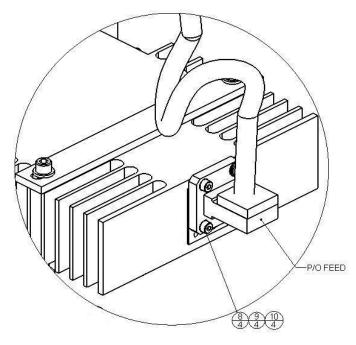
Standard Ku-Band 4W ODU (BUC) Assembly - Detail C
